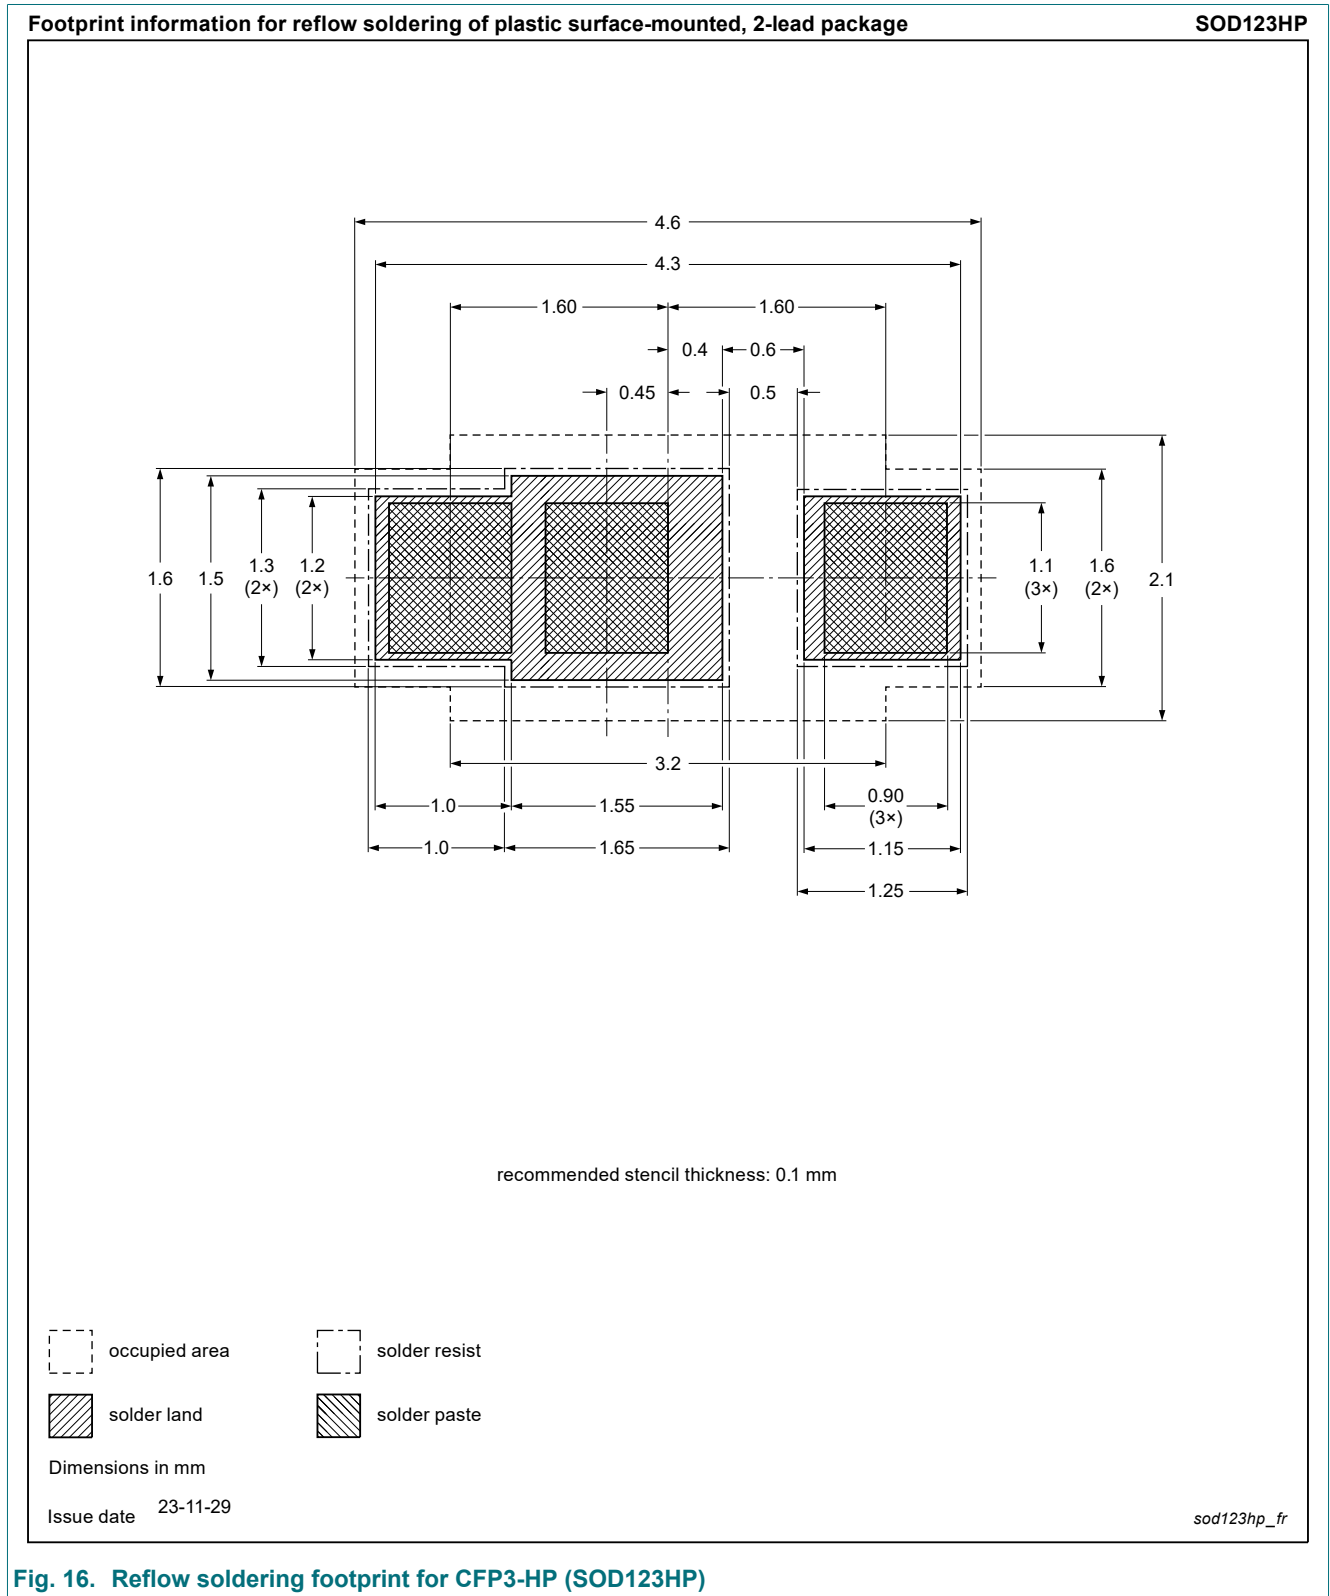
Reflow soldering footprint for CFP3-HP (SOD123HP)
